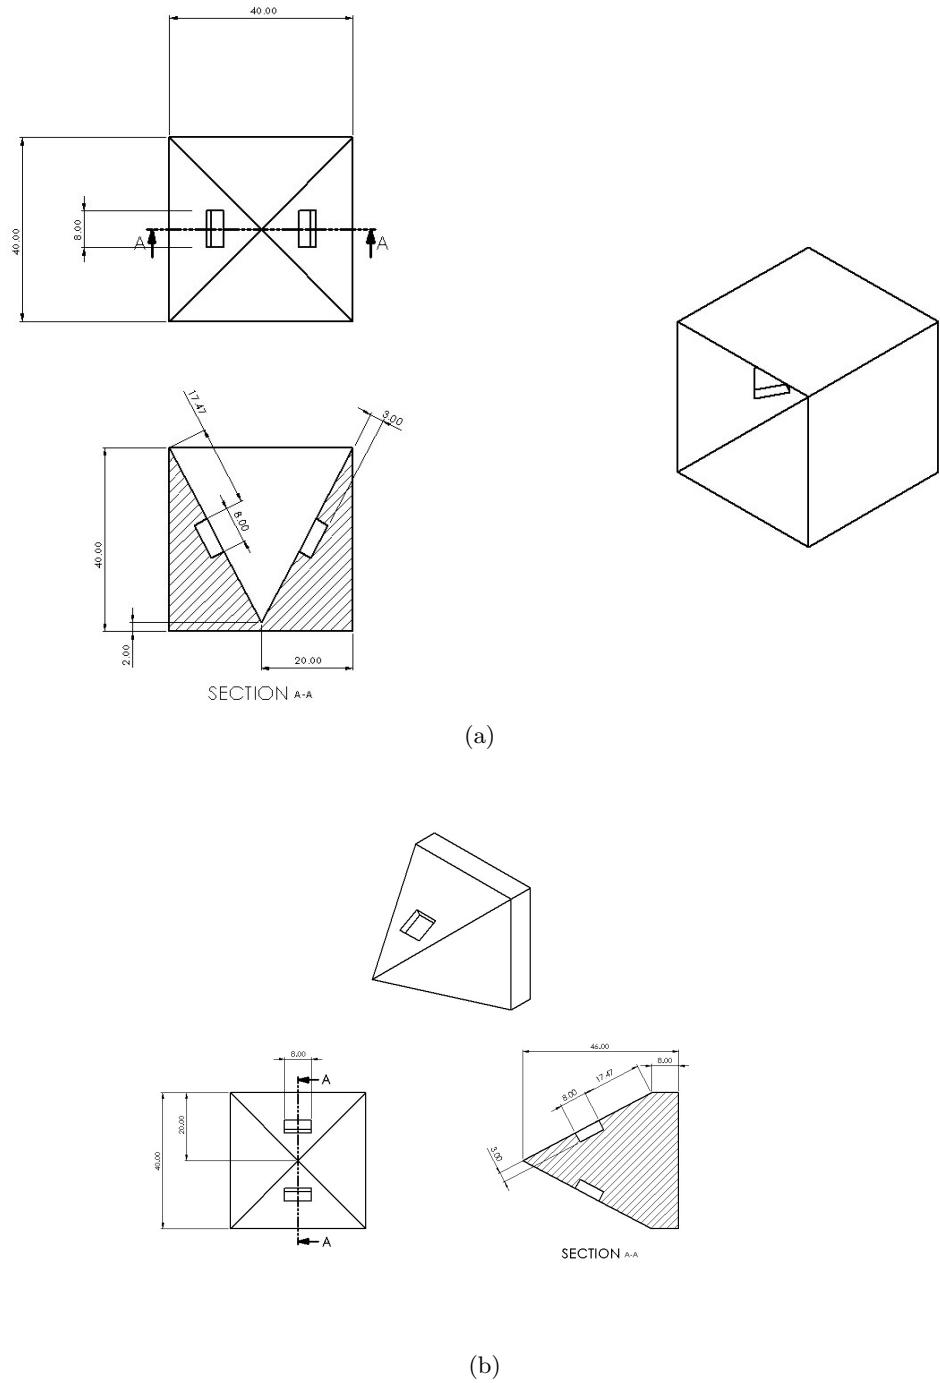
Technical drawing of Reconfiguration Female(a) and Male(b) parts.
